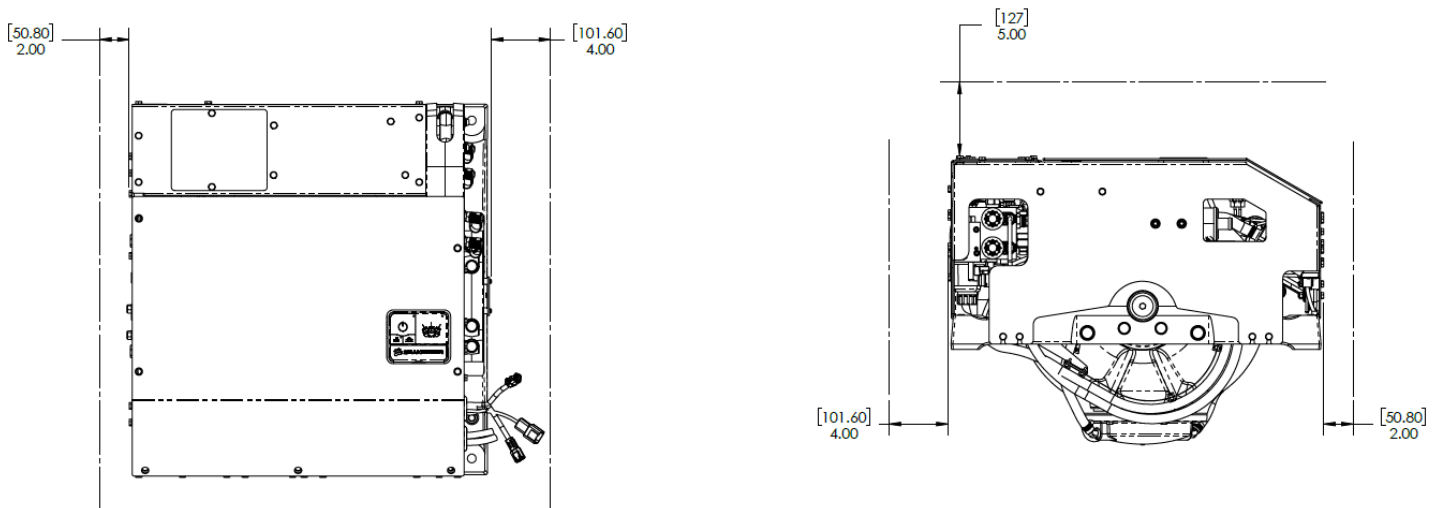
Seakeeper 2 Bolt-In Clearance Dimensions
